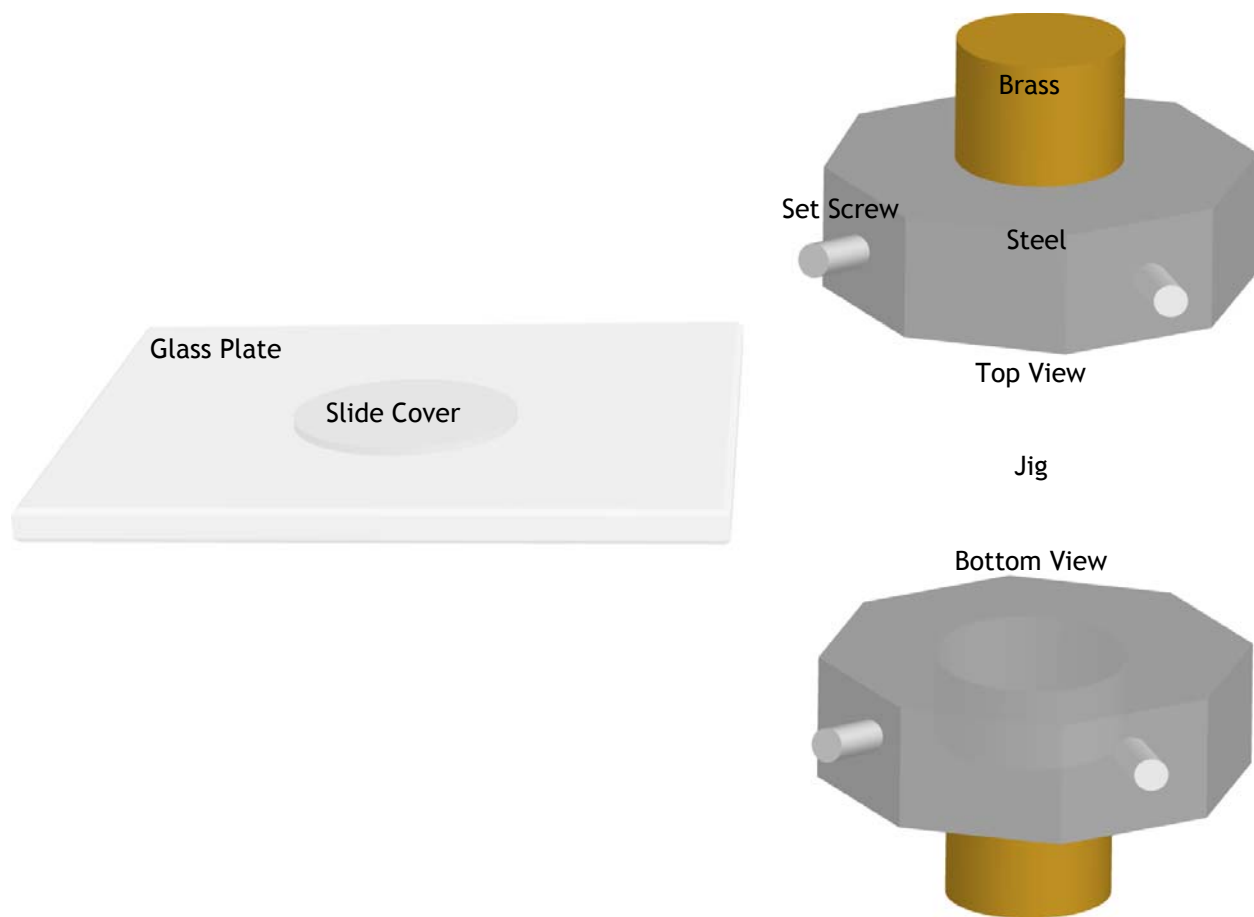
Schematic drawing of the tools used to ensure a planar sample surface during polishing to remove the grain boundary ridges.
